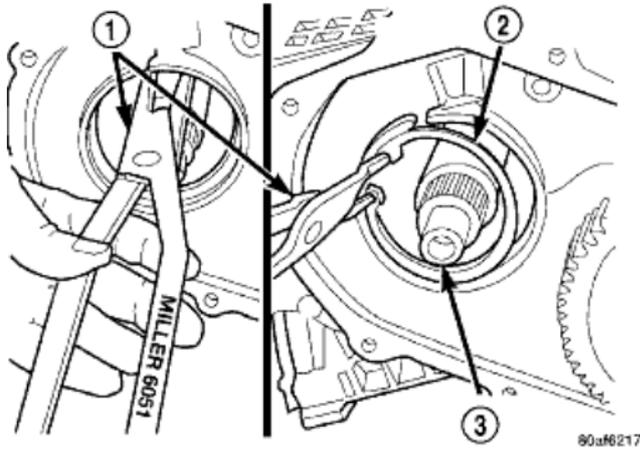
Removing/Installing Transfer Shaft Bearing Snap Ring
